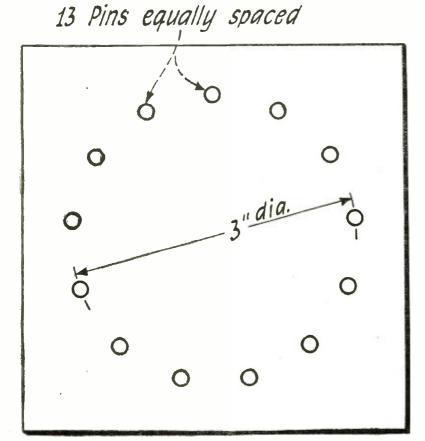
Full size template for making a form for winding the low loss coils. This should be cut out, pasted to a board and nails driven through the centers of the small circles. The heads of the nails must be removed in order to remove the coil.
